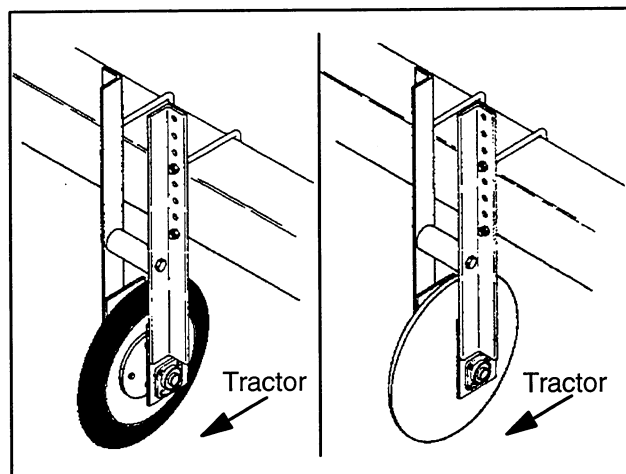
Semi-Pneumatic & Steel Guide Wheels
